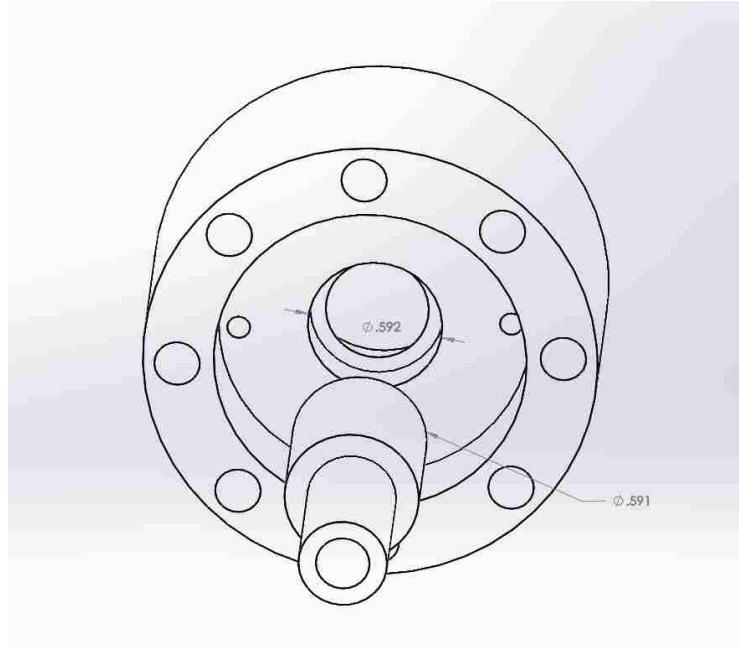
The clearance between the hole in the nozzle mount and the nozzle shaft.
